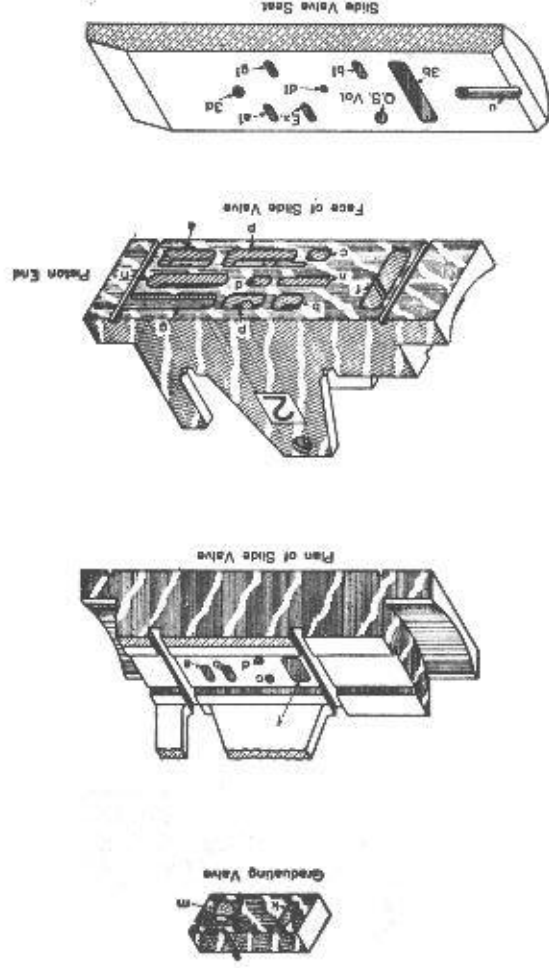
Service Graduating Valve, Slide Valve and Seat
